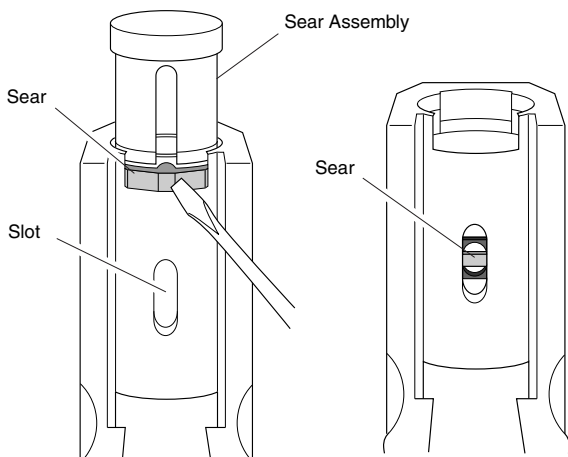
Inserting Sear Assembly Into Cylinder As Viewed From Bottom Of Tool
